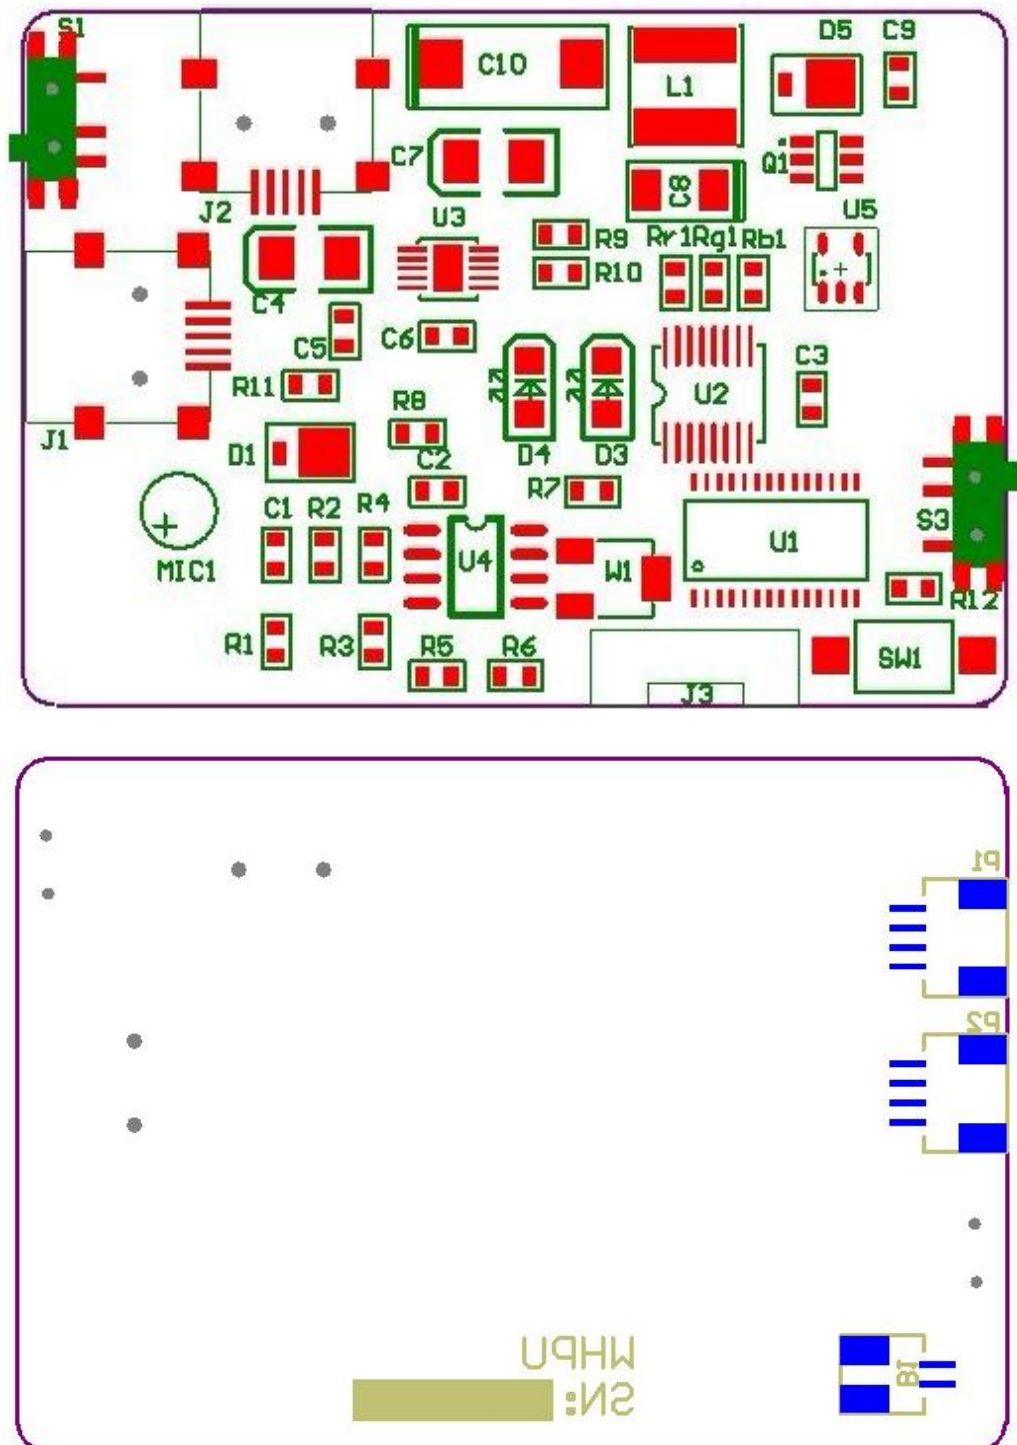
Electronic components layout of the final PCB prototype – Front and back
